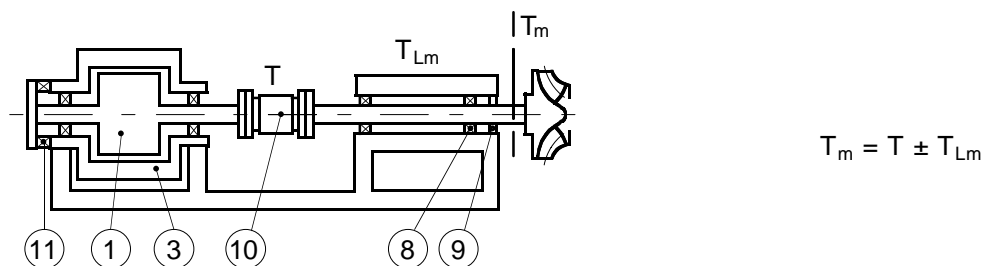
Arrangement using a torquemeter with machine bearings and seals not in balance
